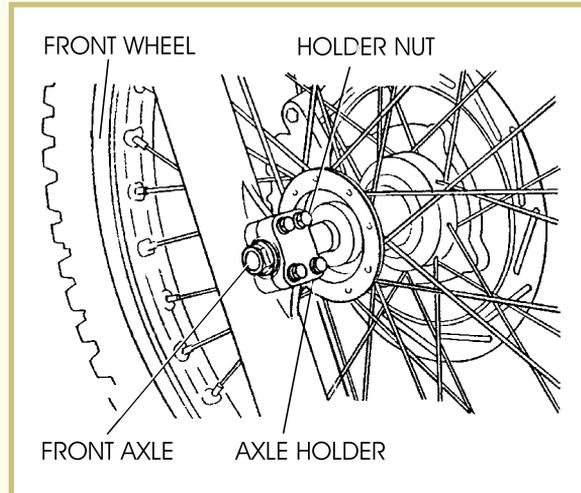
This style of axle holder allows the removal of the entire wheel and axle as one assembly.
